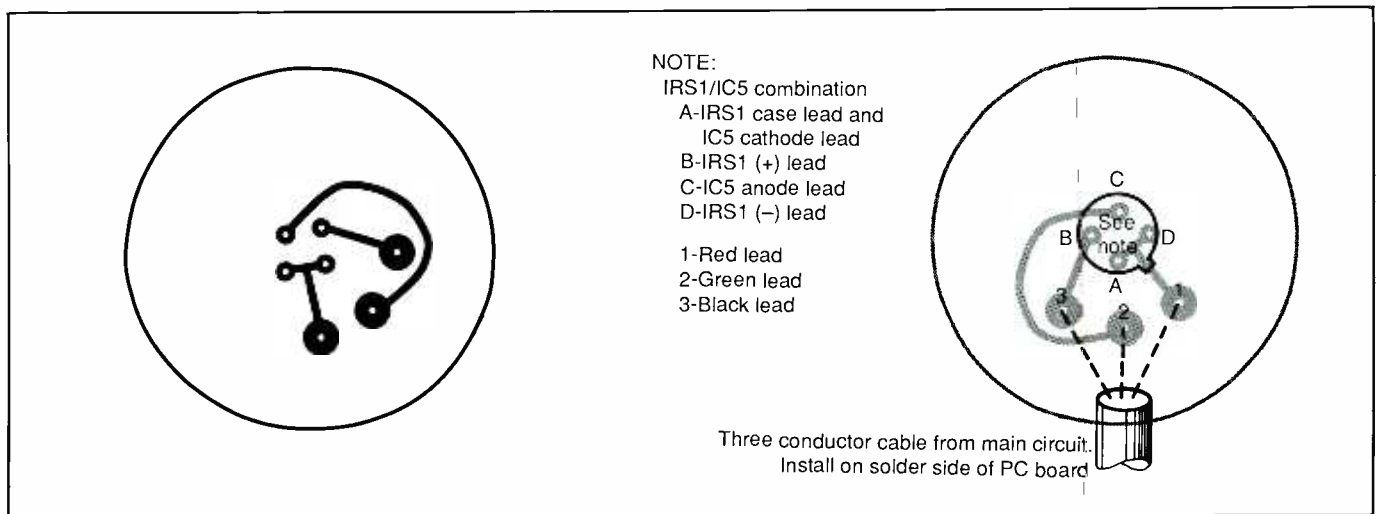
Actual-size etching-and-drilling guide (A) for probe pc board and wiring guide (B) for same.
